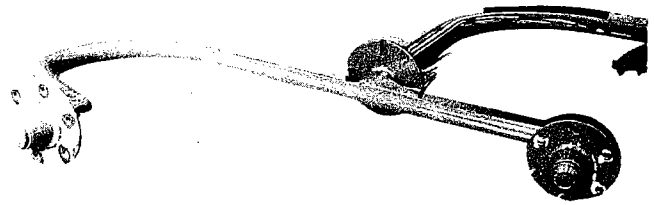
Wheel Arm Installed on Left End of Main Frame of Right Rake Assembly
